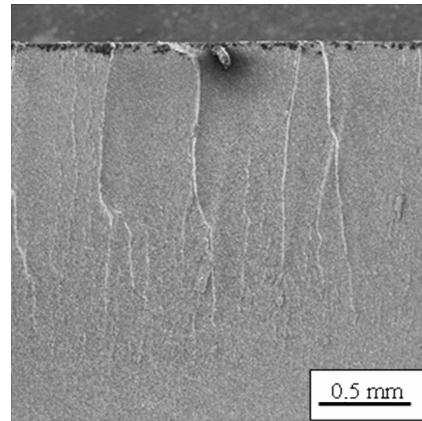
Fracture surface of the sample processed using the C treatment
